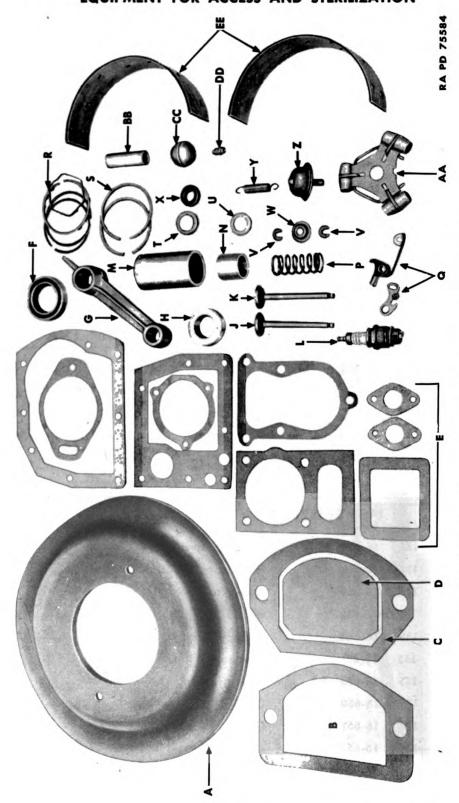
Engine-driven Diaphragm Pump Spare Parts
